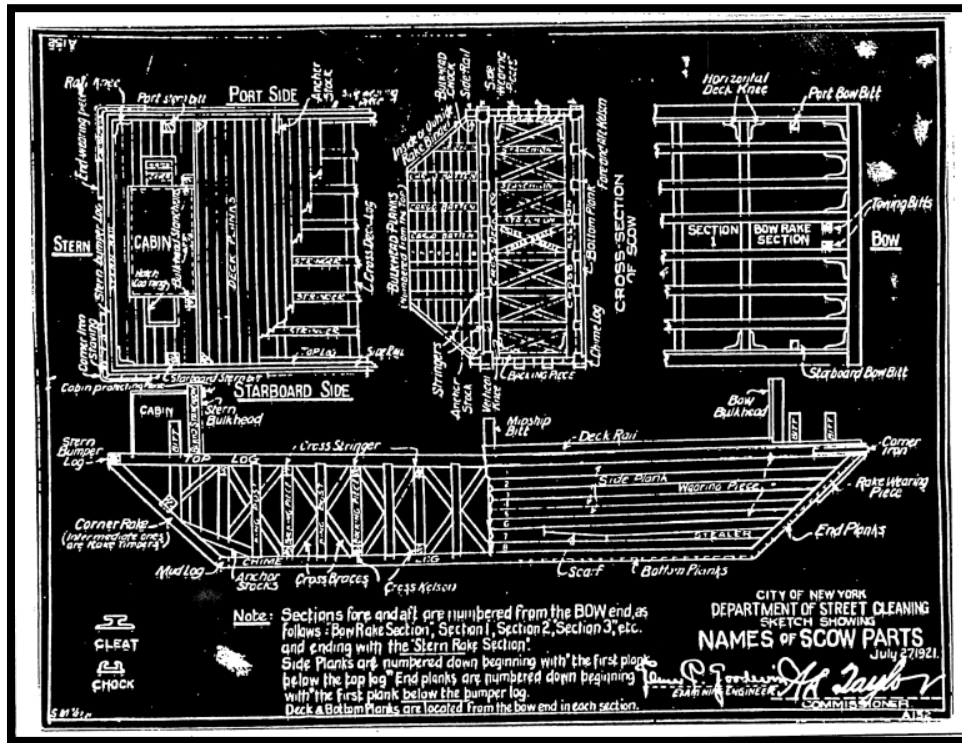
Plan of a 1921 street cleaning scow (Image by New York City Department of Street Cleaning 1921).
